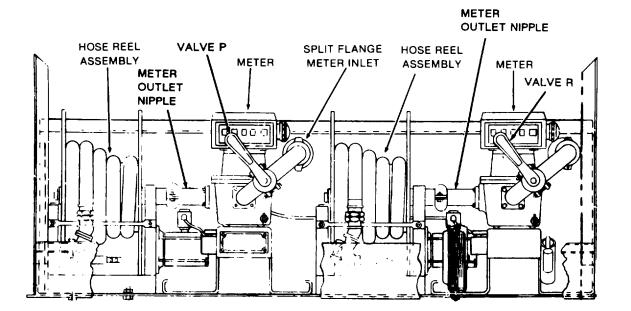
Hose Reel Cabinet Assembly, (M969 and M969A1) Roadside View.
